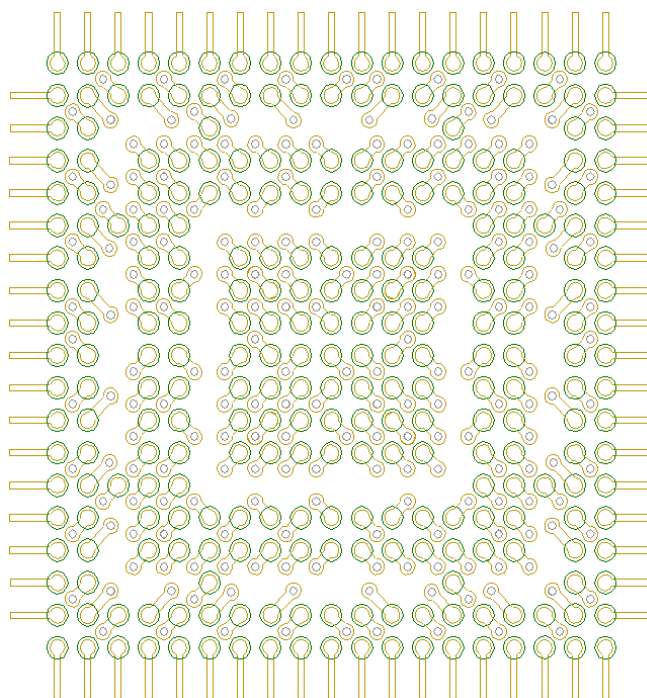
• Suggested Board Layout for NSMD, 3-Layer PTH of Soldered Pads for CS281 CSPs (PCB Top Layer)
